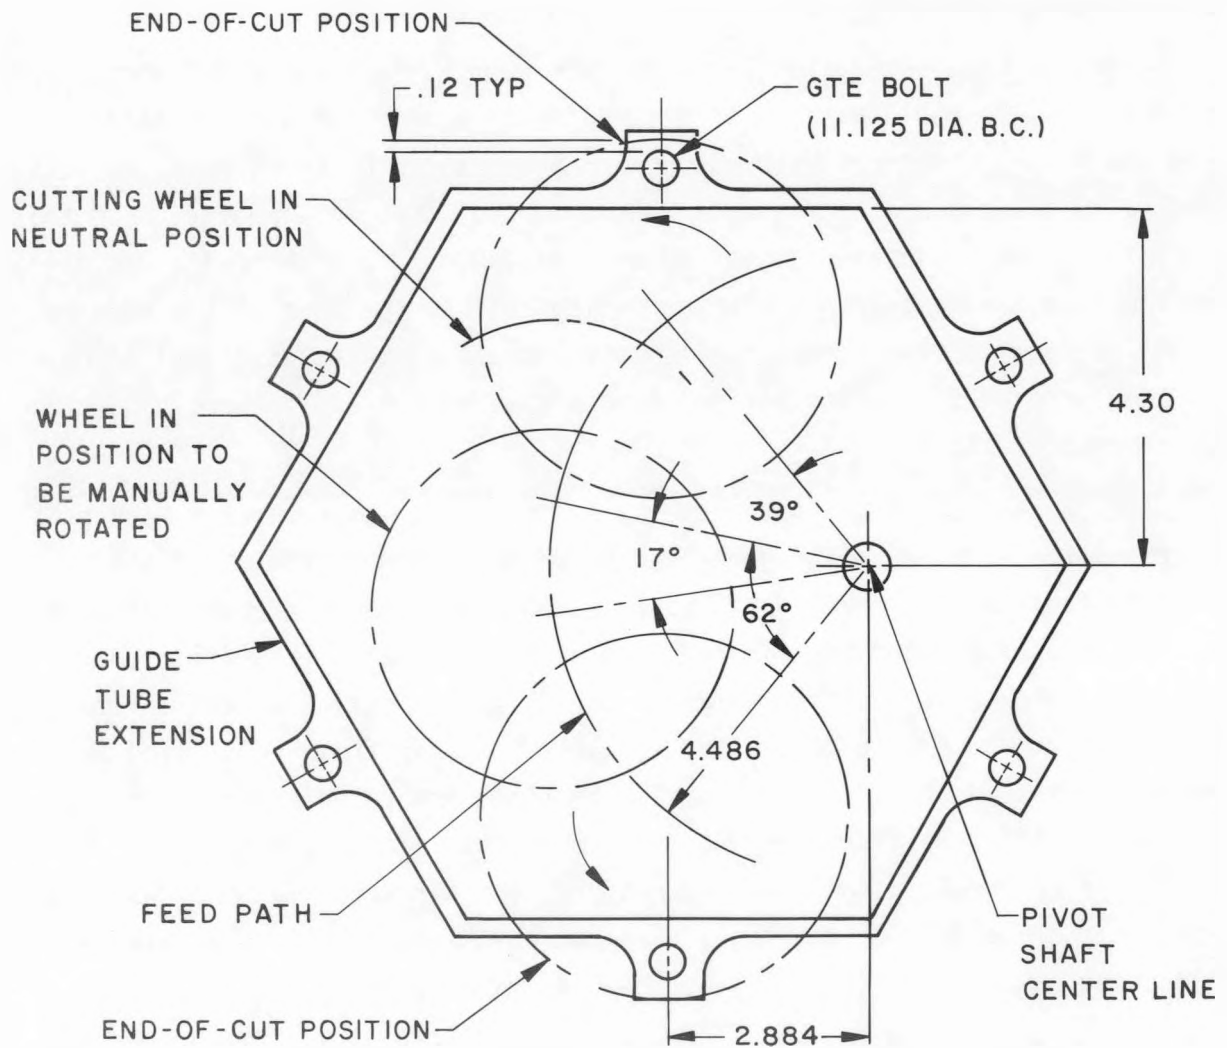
Feed Path of Guide Tube Extension Bolt
